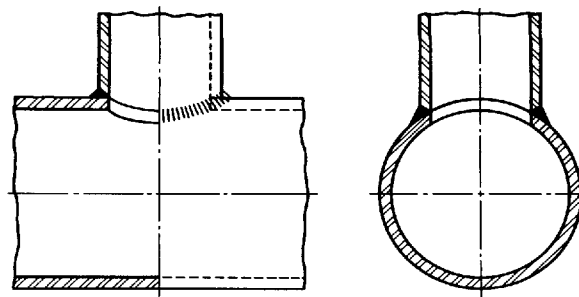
A TYPICAL WELDED BRANCH CONNECTION WITHOUT ADDITIONAL REINFORCEMENT
